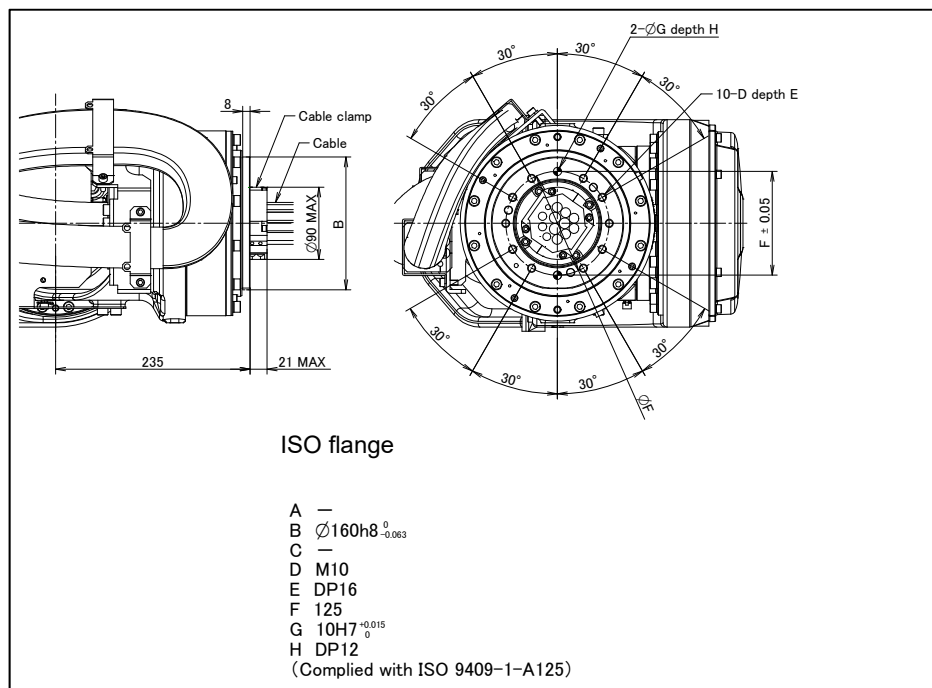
(i) End effector mounting face (ISO flange) (R-2000iB/210FS/220US)
